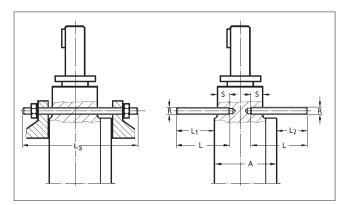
Stud bolt mounting dimensions, mounting option SB
